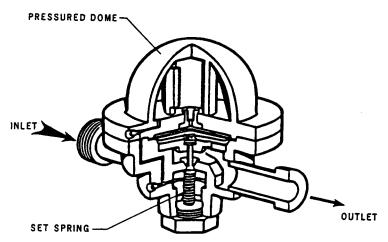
Standard 4,500 lb/in² Air Reducing Valve
